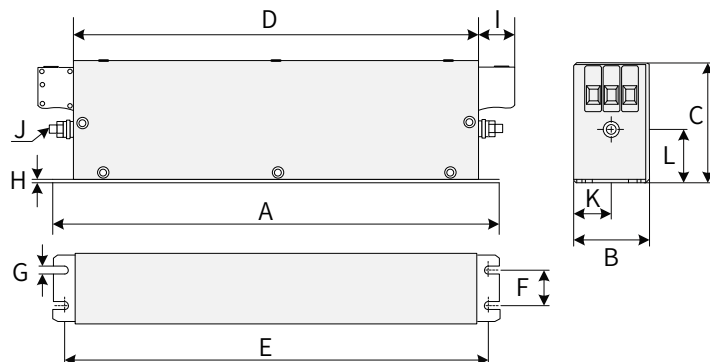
Dimension drawing of FN 3258 series filters (unit: mm)
